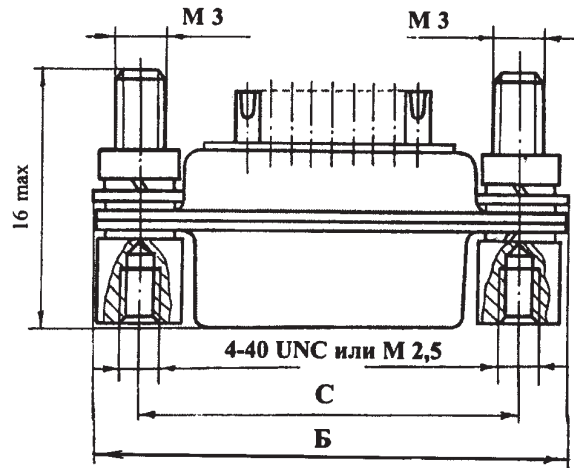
Plug (socket) of three dimensions wiring with special screws
